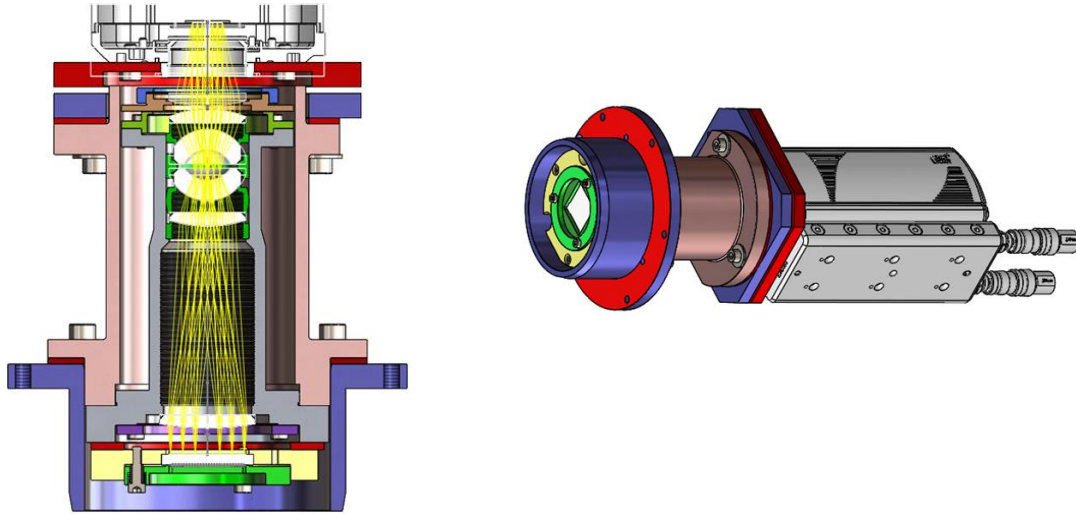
Left: ray tracing and opto-mechanical concept of the LDM. Right: global CAD view of the LDM with the CBLUE1 camera.
